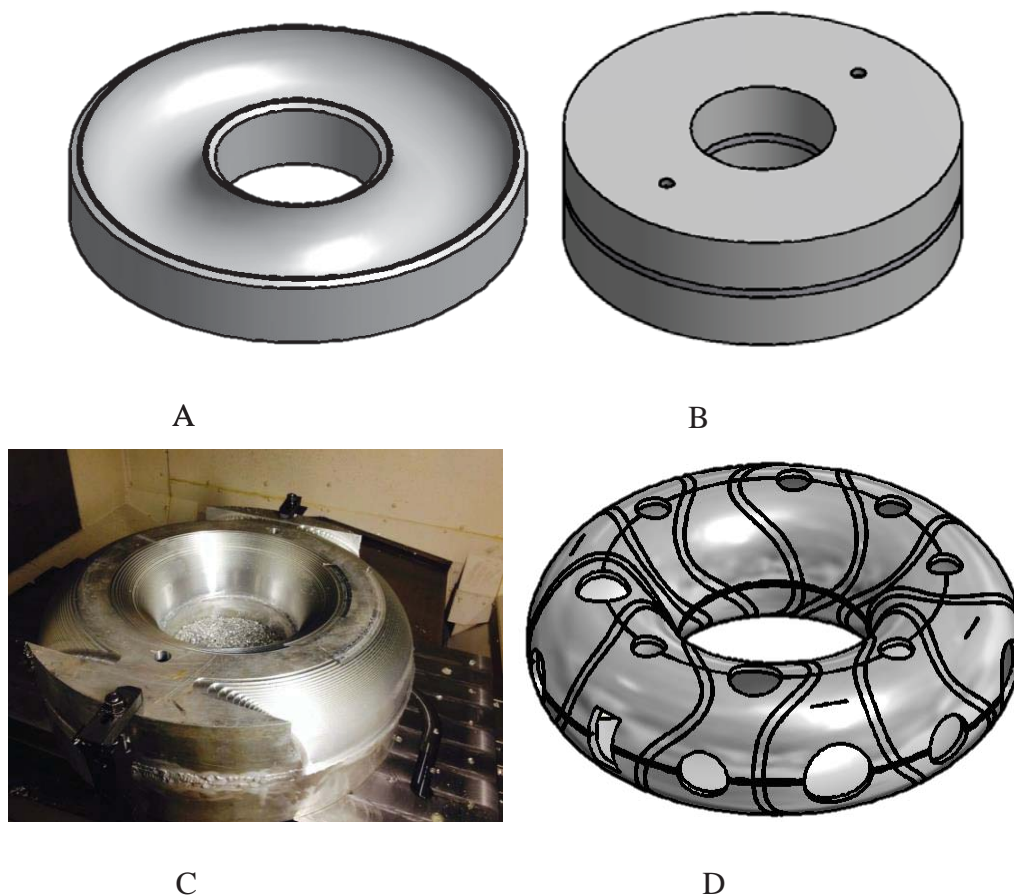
A) It shows the interior shape. B) It shows how the two halves are welded with the interior shape. C) It shows how the exterior shape is milled. D) It shows the holes on the vacuum chamber.
